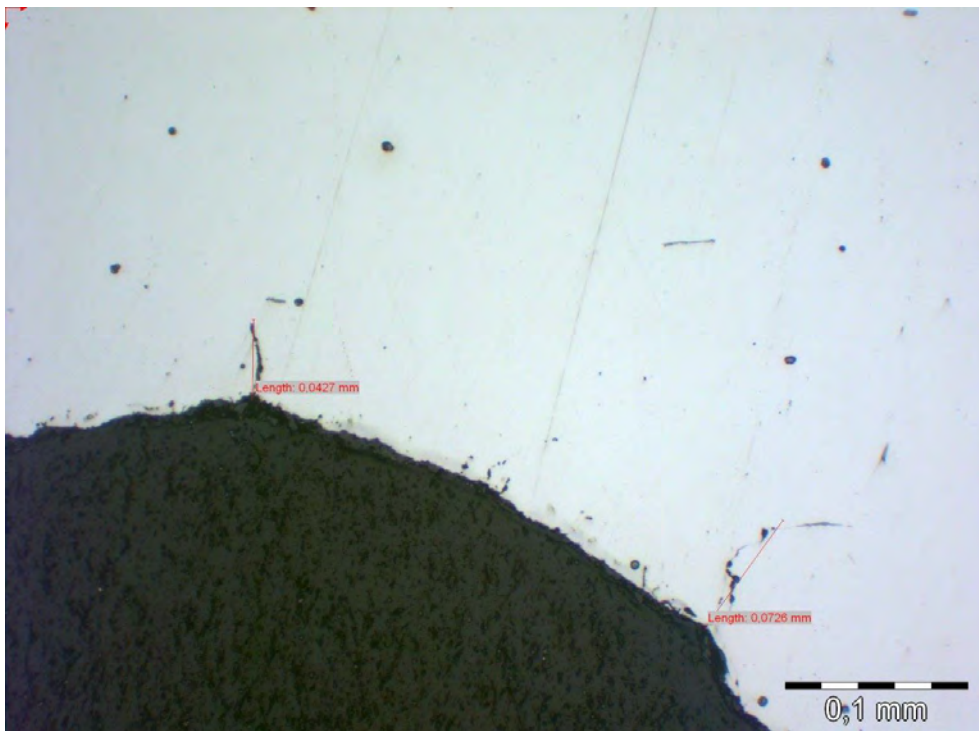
Cut four in crack at segment A, second ridge on barrel no. 14389
